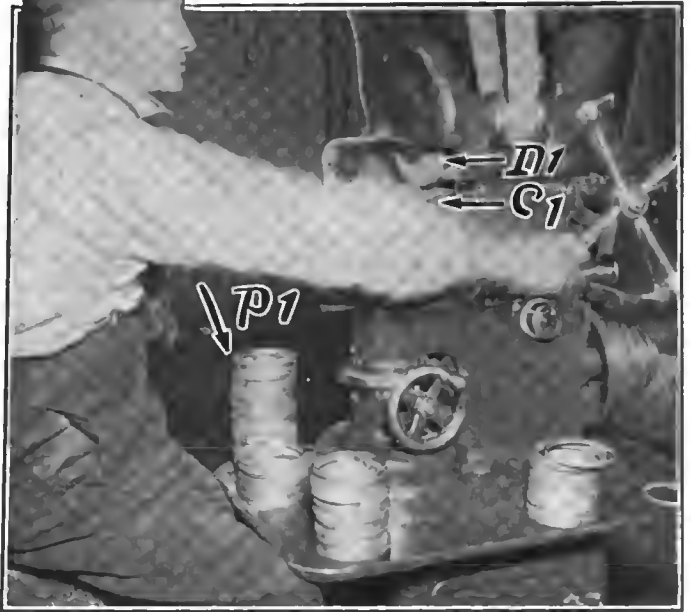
Piston ring grinder with magnetic chuck finishing piston rings for Excelsior motors
